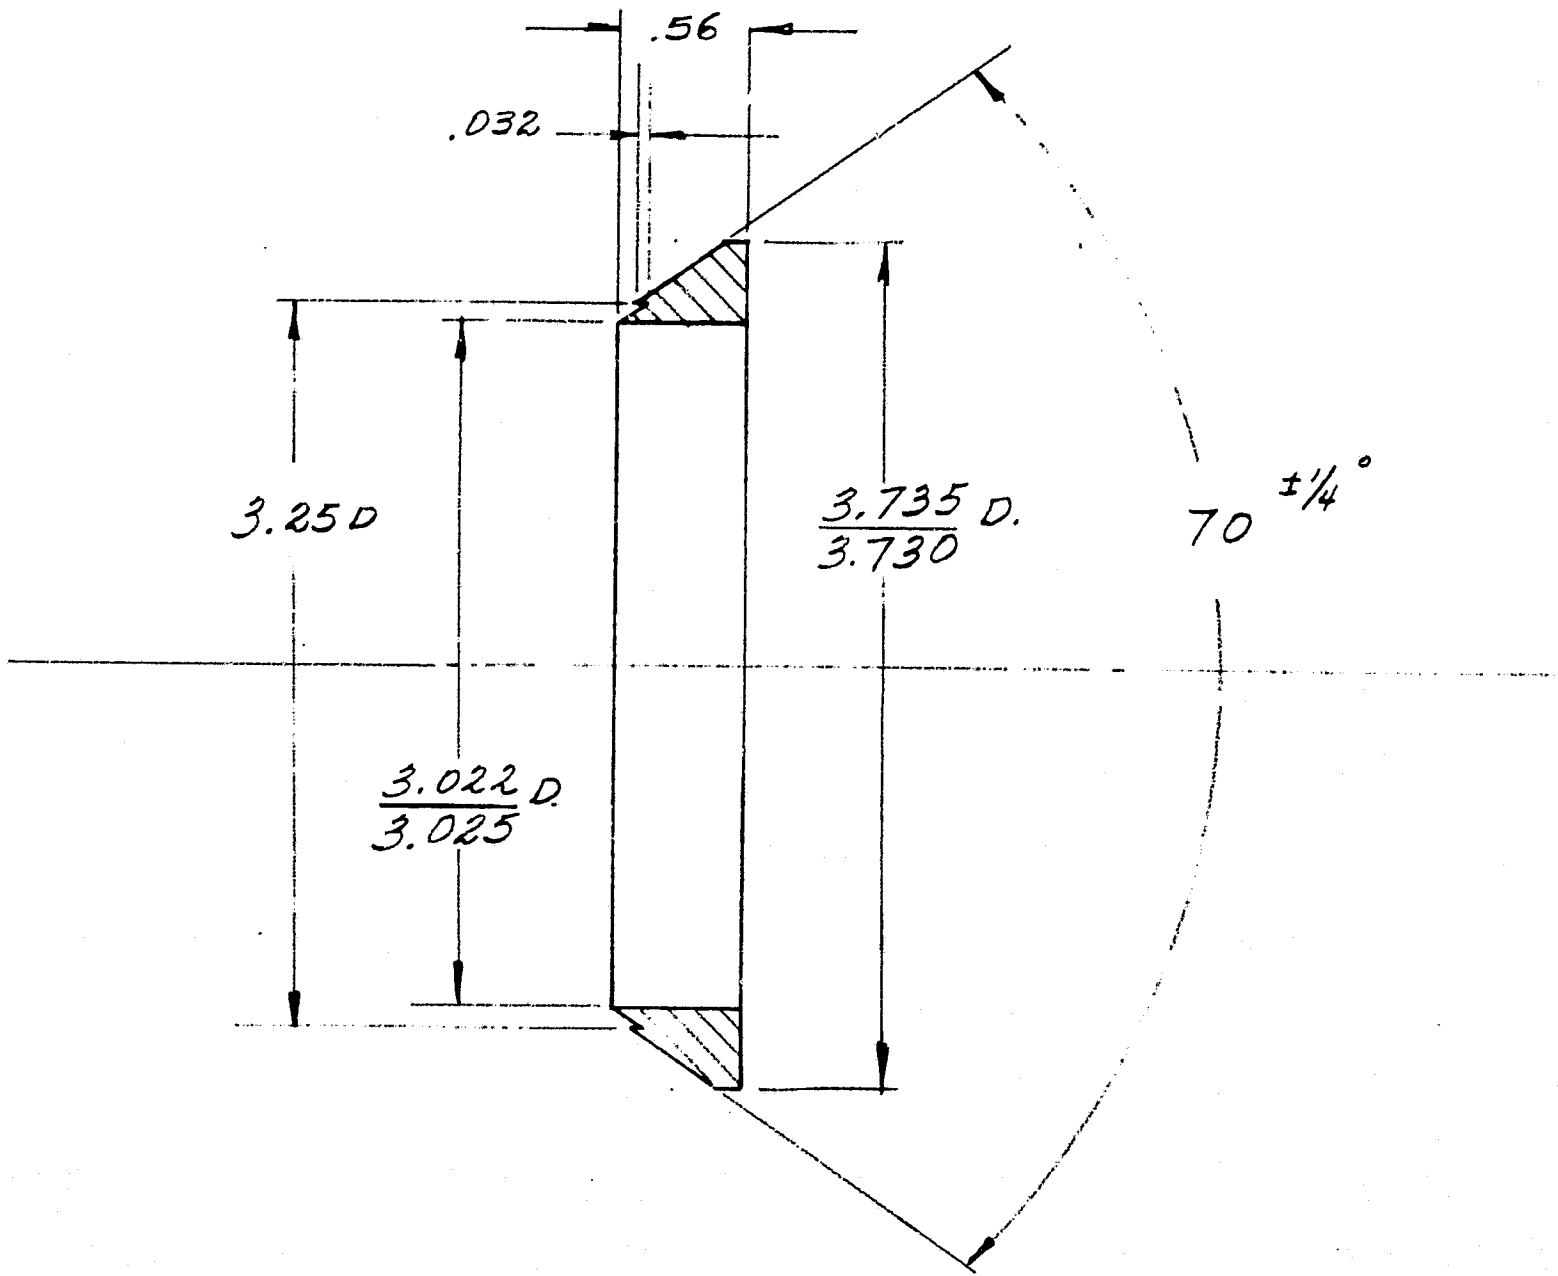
Male Adapter, Reed Seal - Three-Inch Rod - Material, 17-4PH CRS
